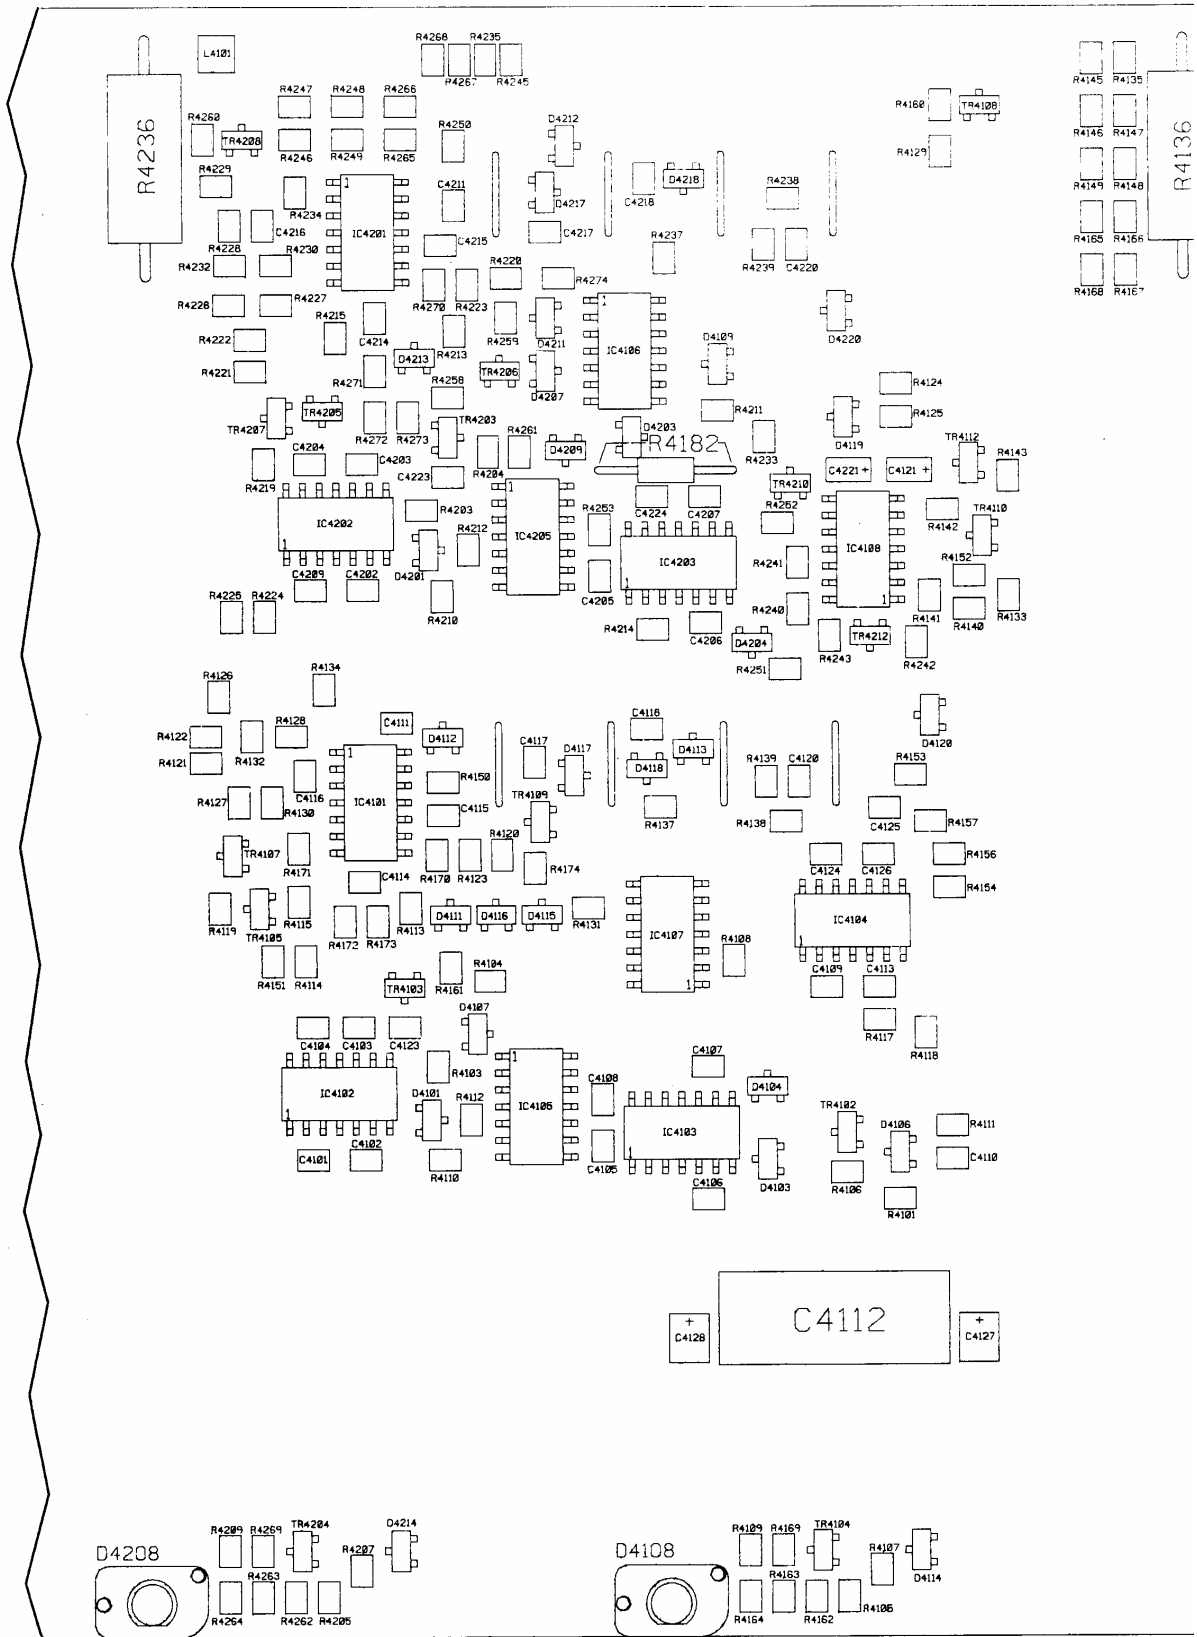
MULTI-UNIT CHARGER PCB SECOND AND THIRD POCKETS LAYOUT DIAGRAM
